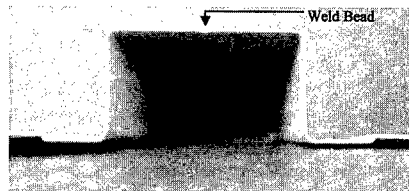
shows an article formed using the blank sheet with the longitudinal weld line (Fig.2 (a)). The article is formed almost along the die surface in good condition. This result is similar to an article of a blank sheet without weld line.
